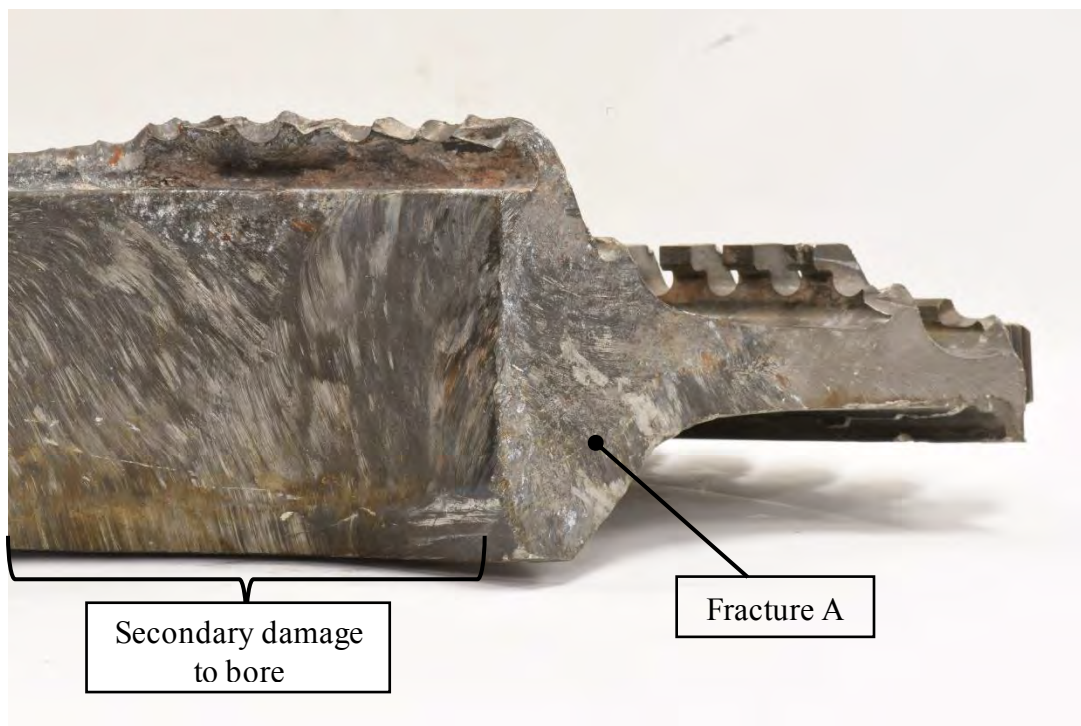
Images showing damage to the bore at the Fracture A side of Fragment 2.
